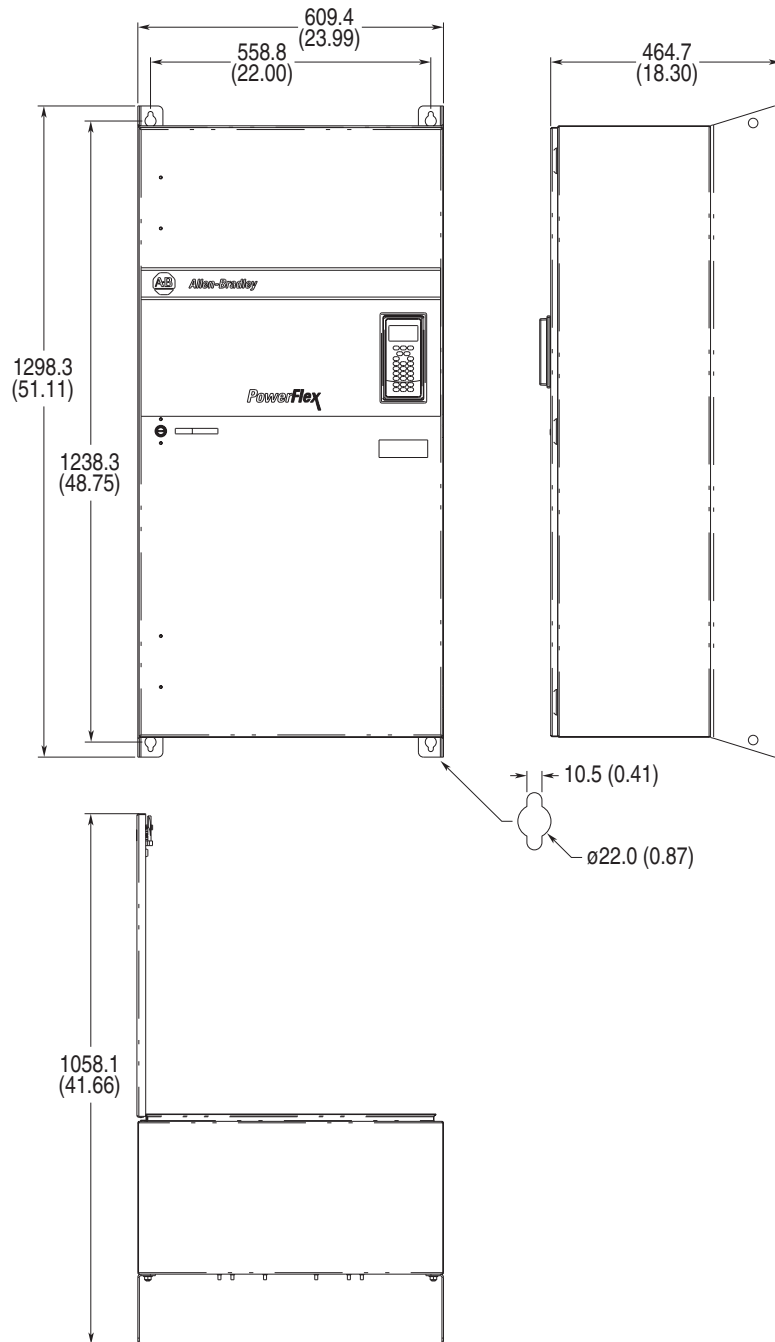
NEMA/UL Type 1 Kit Frame 6
